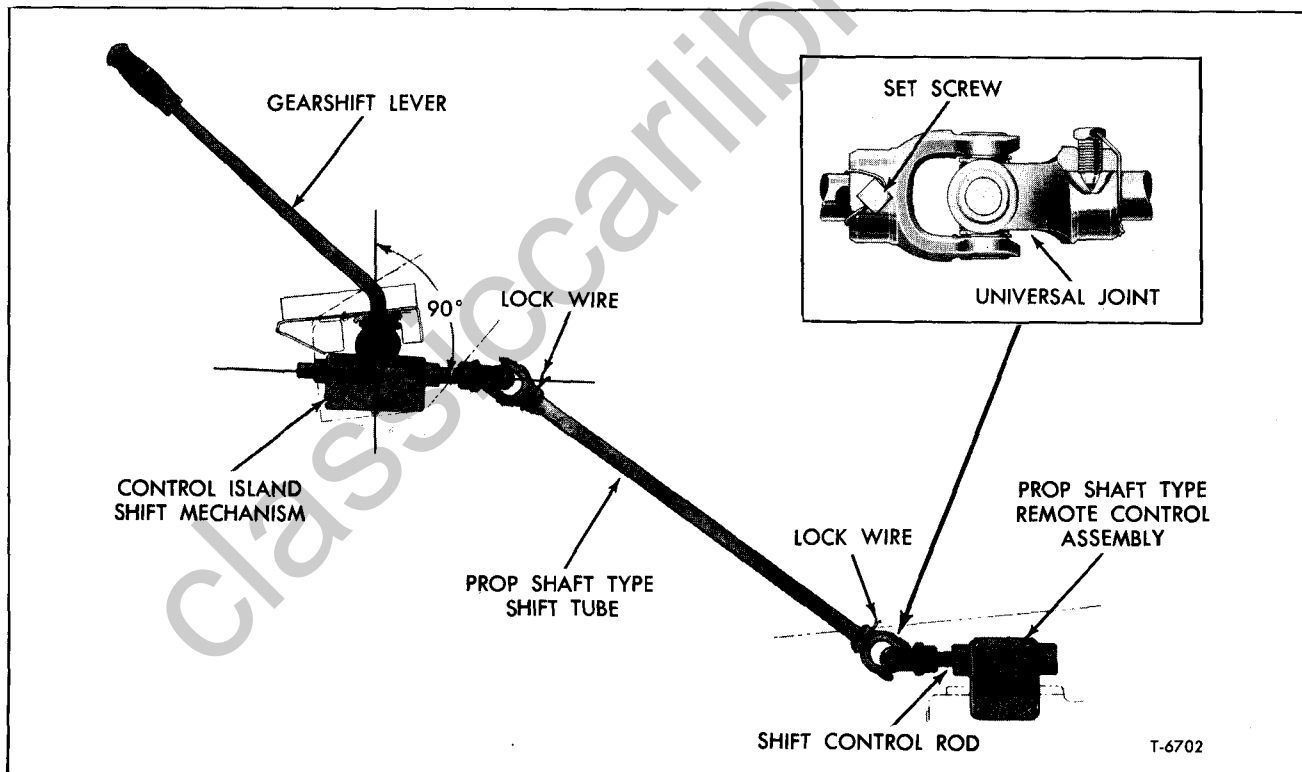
Tilt Cab with One-Piece Shift Rod (90 Series)
